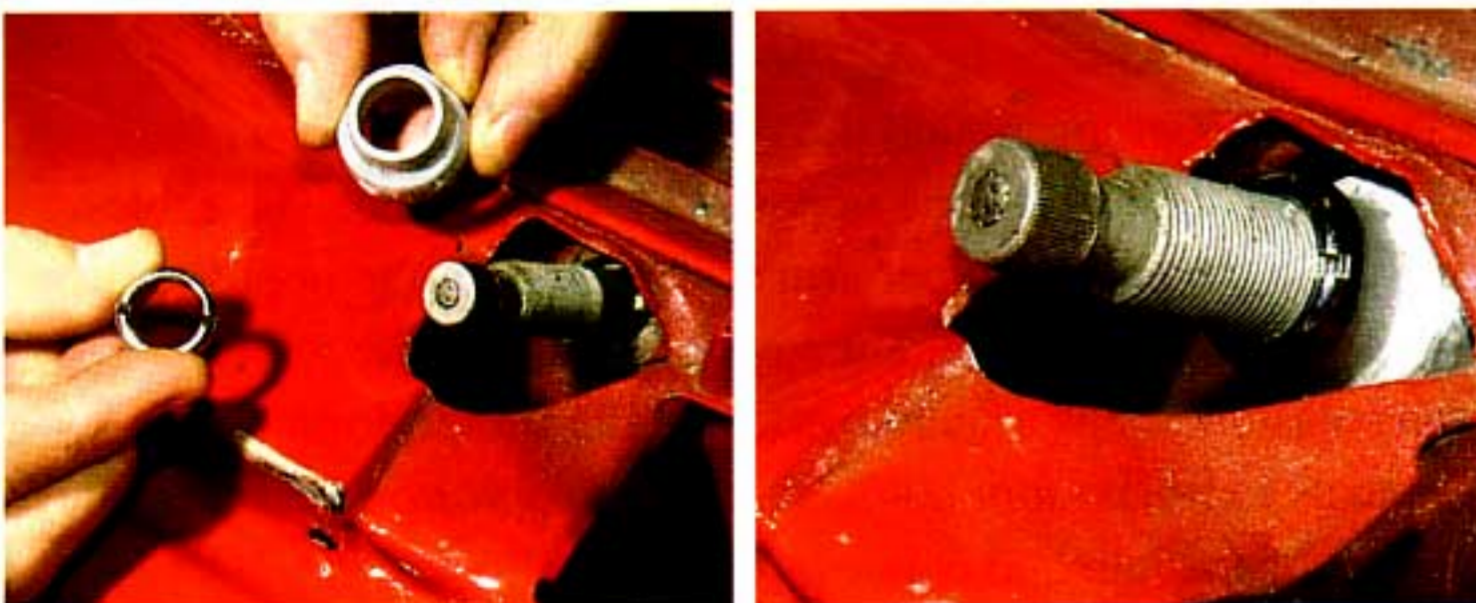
With the cables connected to the center drum, pass the wiper transmissions through the wiper drum hole from the engine side.
